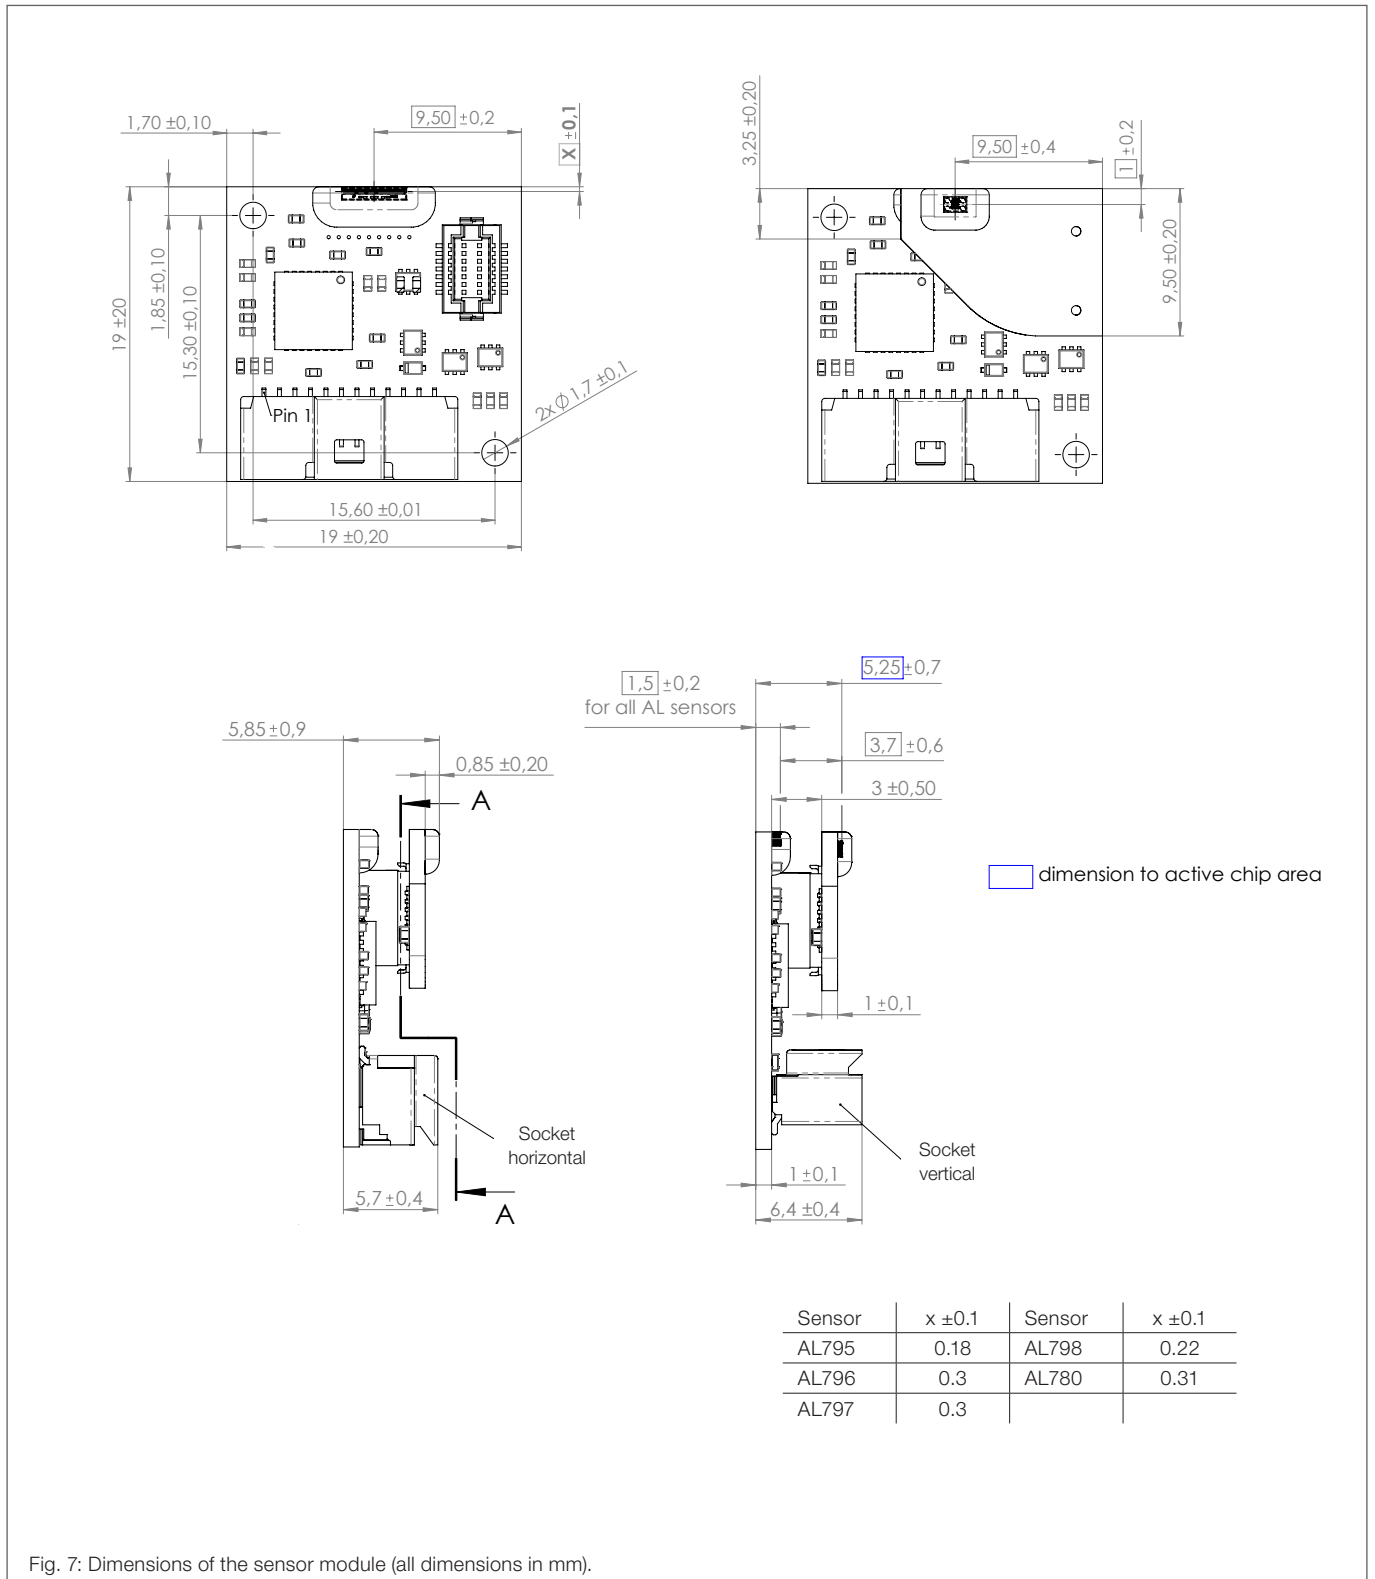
Dimensions of the sensor module (all dimensions in mm).
